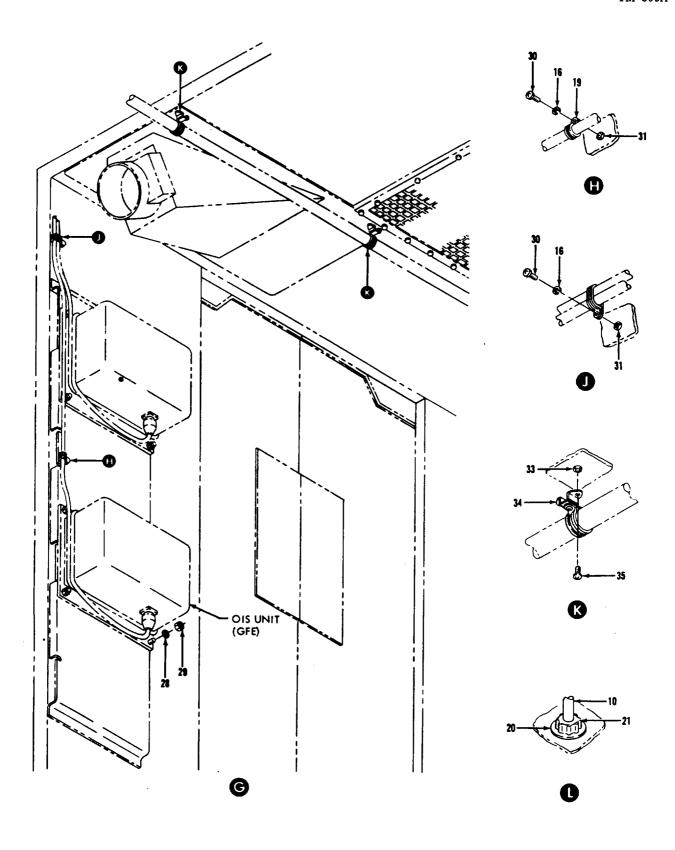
Electrical Equipment Installation (Sheet 4 of 19)
